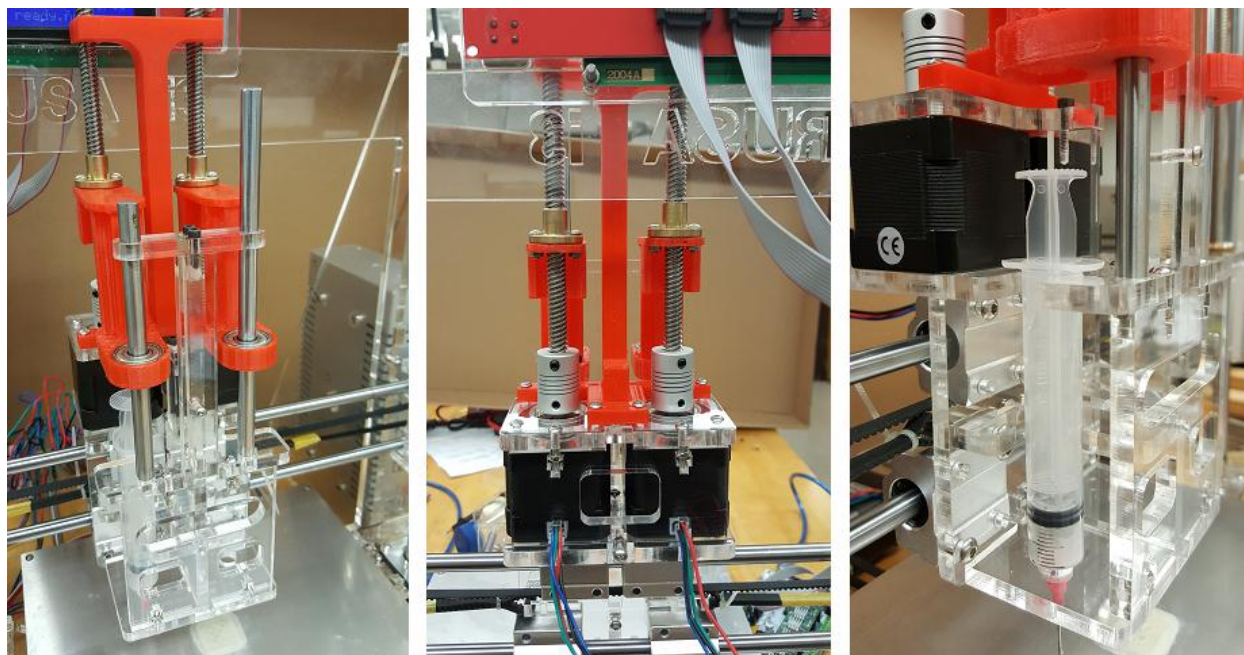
The modified DIW extrusion system on a RepRap Prusa i3.
